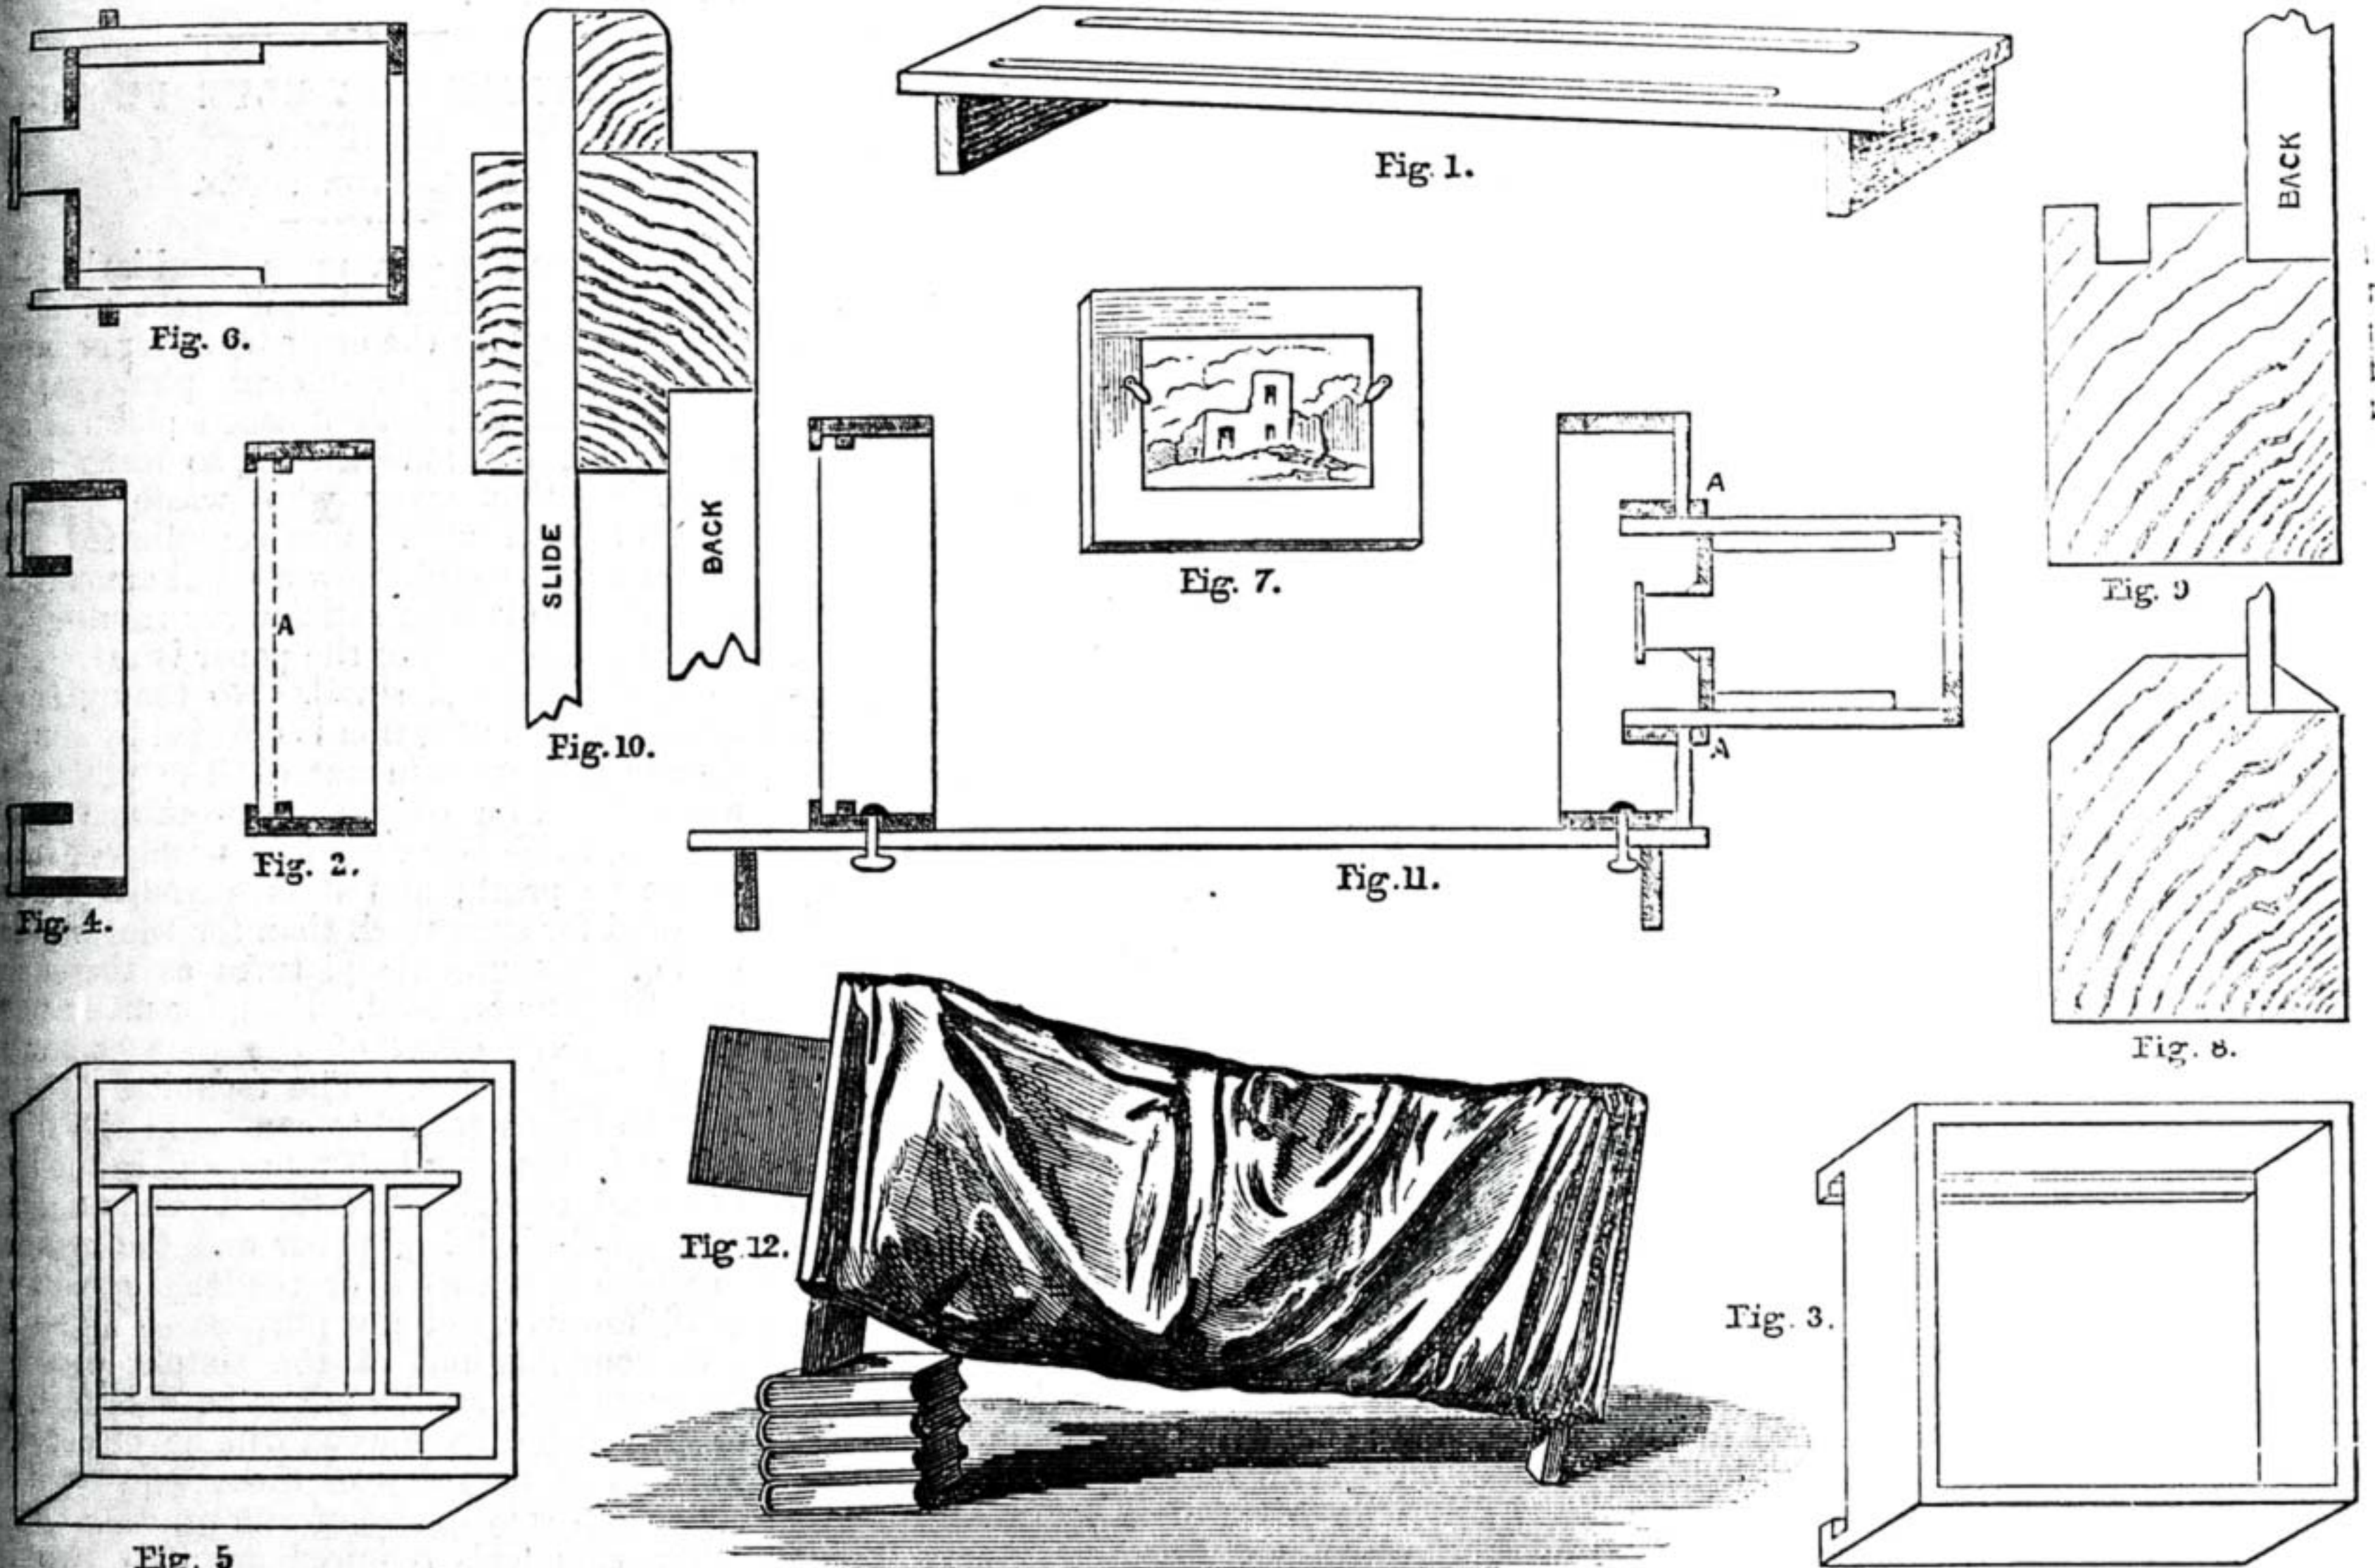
Baseboard, Perspective View, showing Elevation also. Fig. 2.—Camera Back: Section. Fig. 3.—Ditto: Elevation. Fig. 4.—Camera Front: Section. Fig. 5.—Interior of ditto: Elevation. Fig. 6.—Sliding Box for Front of Camera: Section. Fig. 7.—Carrier for Negative. Fig. 8.—Ground Glass Frame: Section. Fig. 9.—Dark Slide Framing: Section. Fig. 10.—Top End of Dark Slide. Fig. 11.—Camera Complete: Section. Fig. 12.—Camera in Position for Enlarging.
